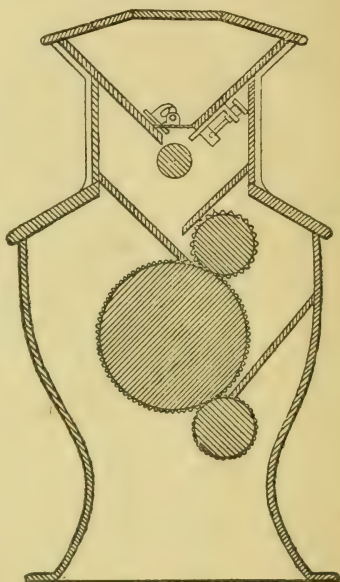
SECTIONAL DRAWING OF A MODERN THREE ROLLER FLOUR MILL.
